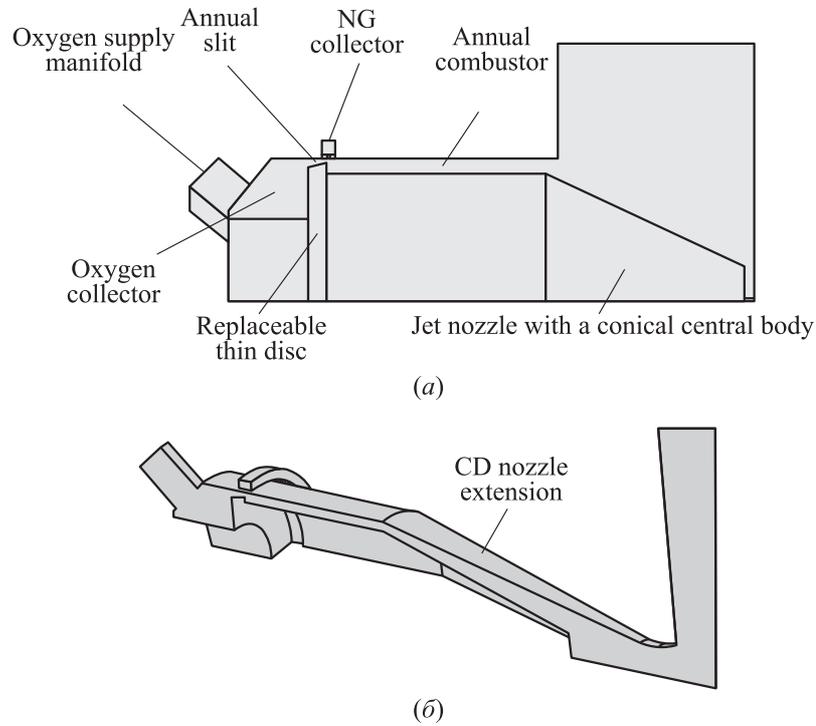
Longitudinal section (a) and a perspective view of a quarter (b) of DLRE of two different configurations with oxygen and NG collectors and pieces of oxygen-feeding manifold
